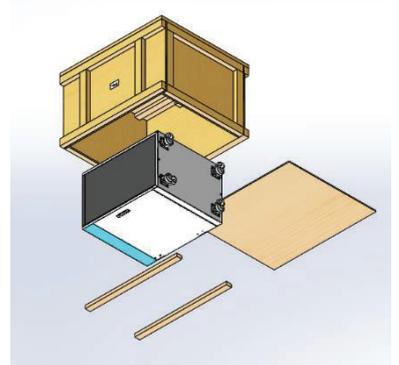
Cabinet Accessory Packaging (PN: 80020). Sold Separately
